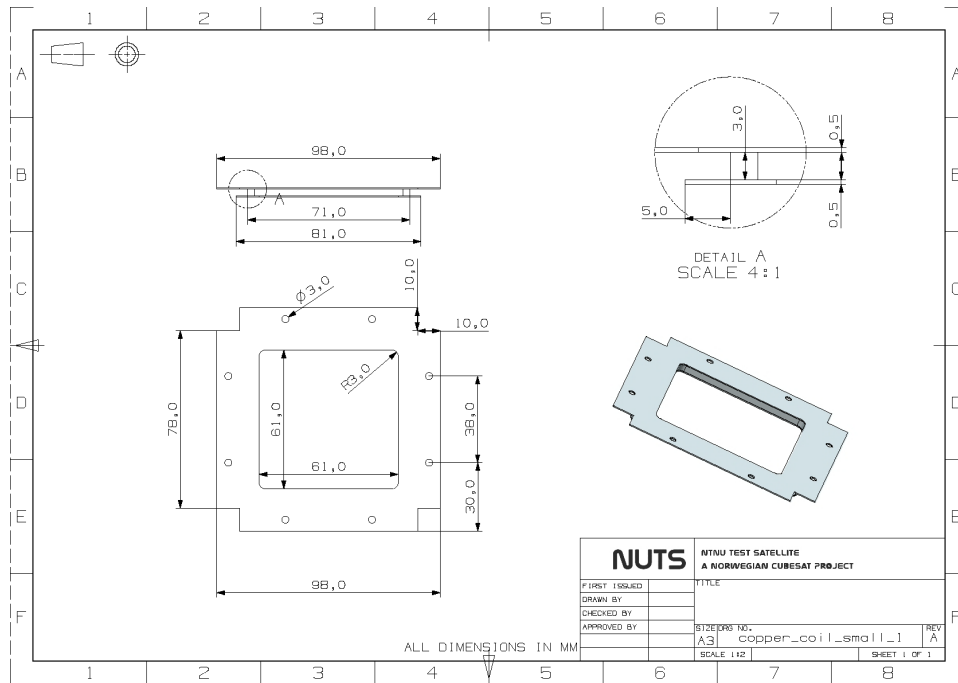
Mechanical drawing of magnetorquer to be used on the z-side.
